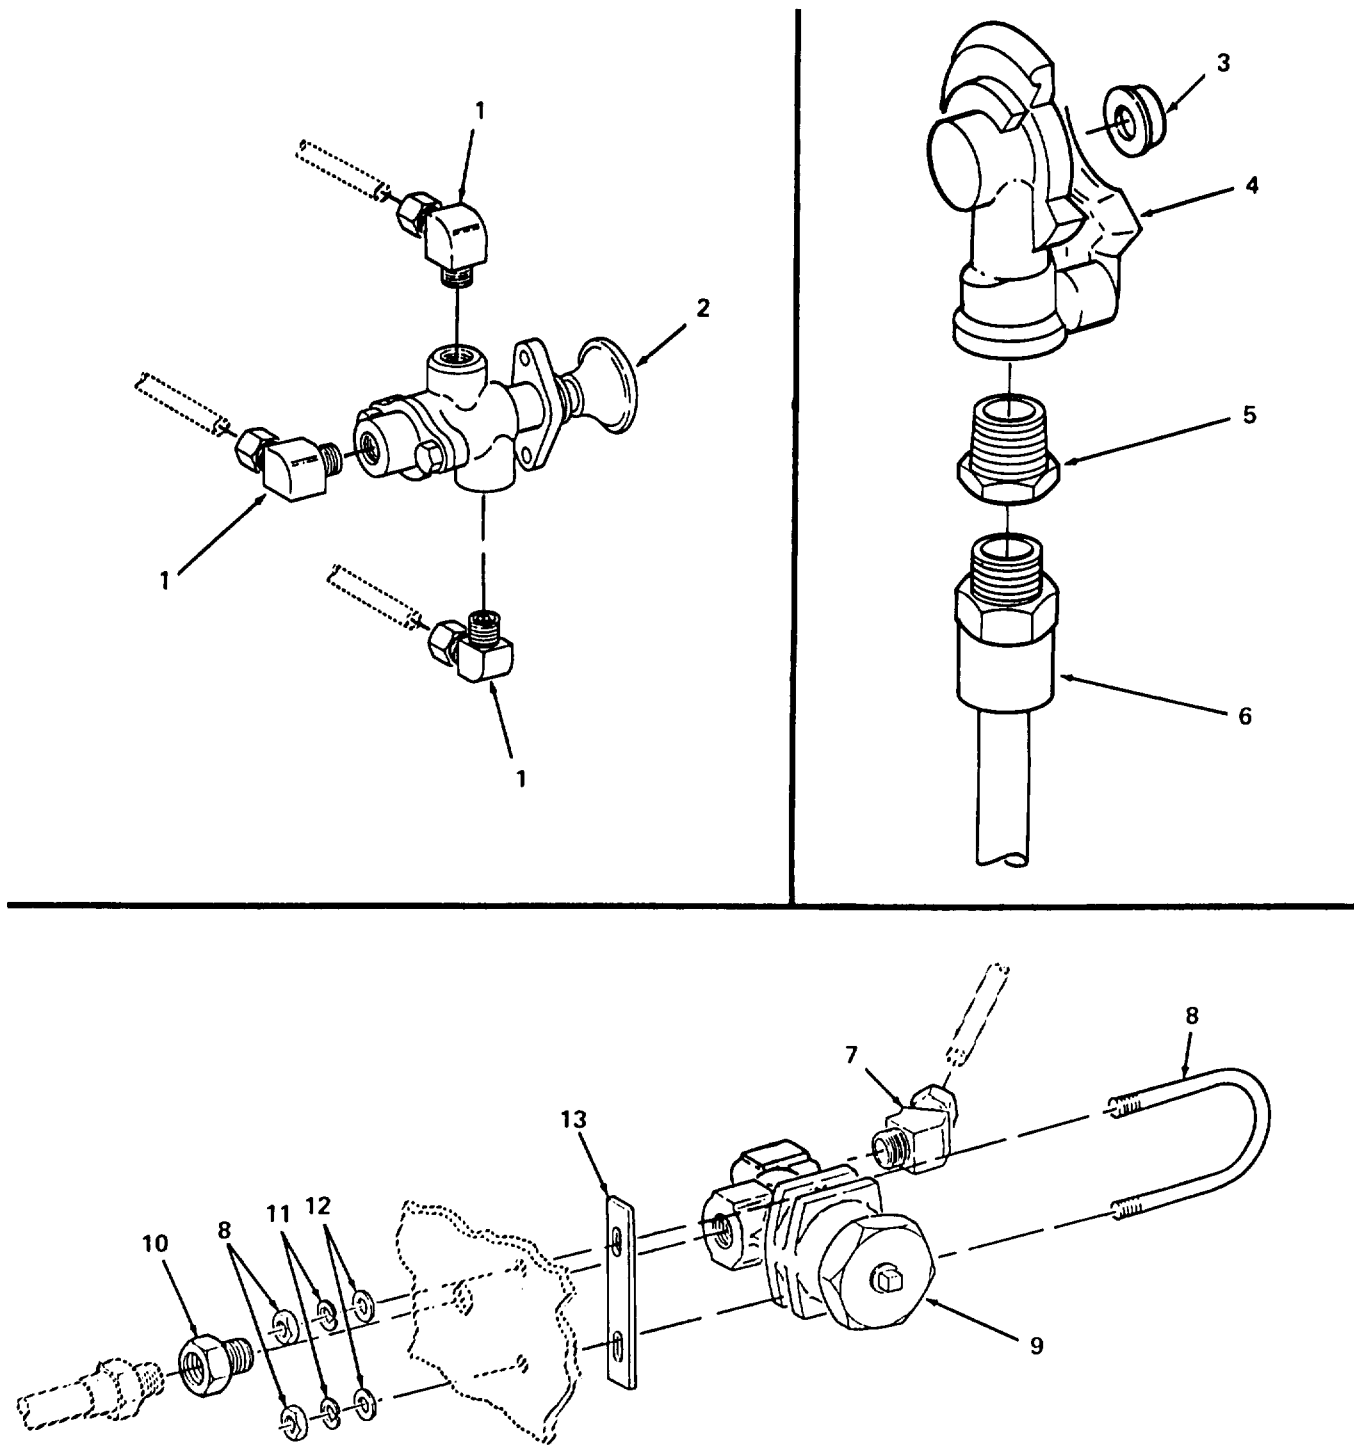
Brake Valve, Gladhand and Air Cleaner Intake
